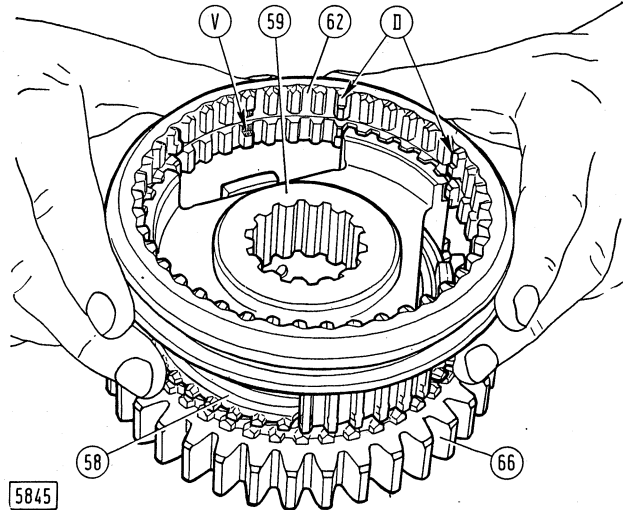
Installing the synchromesh unit engagement ring (62).
